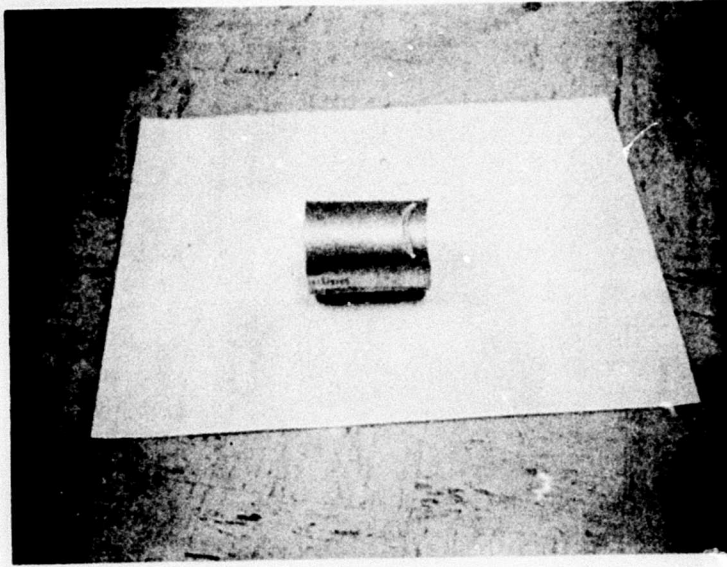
Sheet steel sleeve from Skinner pipe-clamp sample after lateral-stress test.
